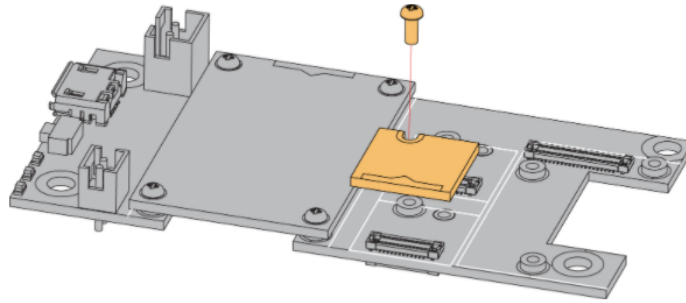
RAK12011 Mounting Mechanism on a WisBlock Base Module
